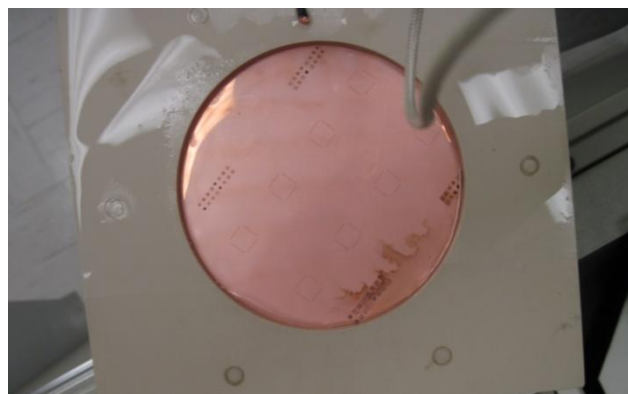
Wafer Removal For Inspection, Surface Oxidation.
